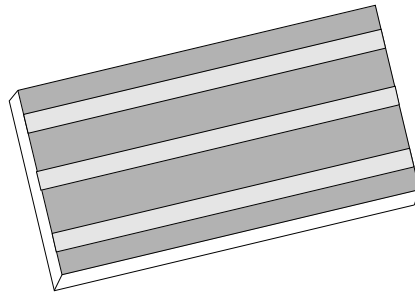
Workpiece 2 from which 3 lines of primer has been removed
